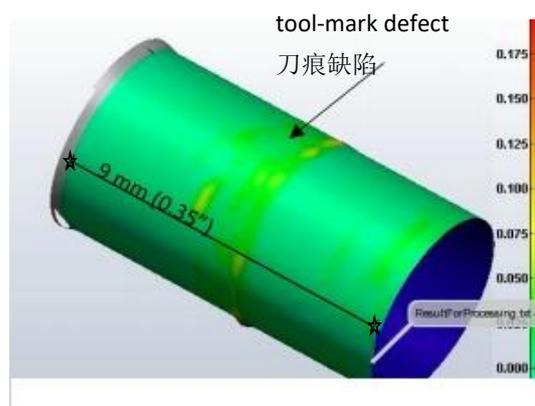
The small-diameter probe of the rotational scanner reaches inside rivet holes to acquire the complete inside surface geometry
